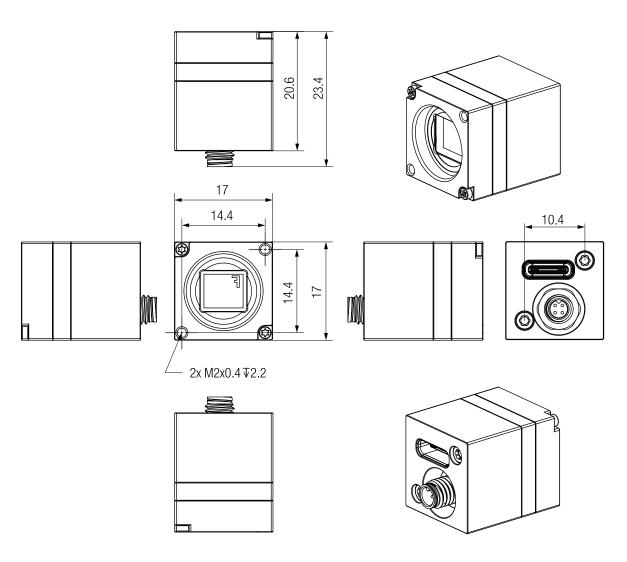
Dimensional drawing of MU051xG-SY with ADPT-MU-17x17-CX3-TC-V adapter
